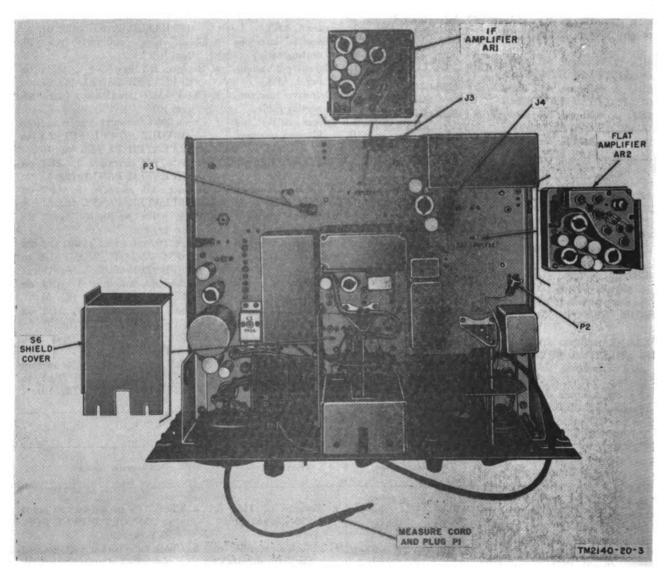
Telephone Test Set TS-761/TCC 8, TEST PANEL, top view of chassis, location of plug-in subassemblies.
